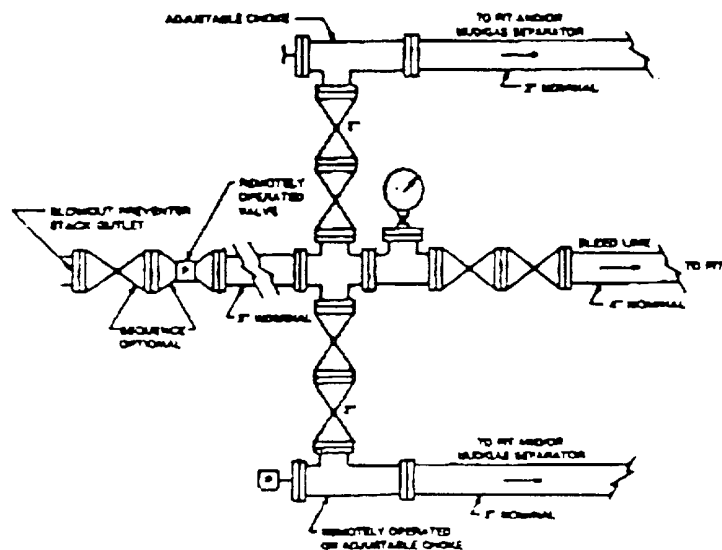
Typical choke manifold assembly for 3M rated working pressure service - surface installation.
